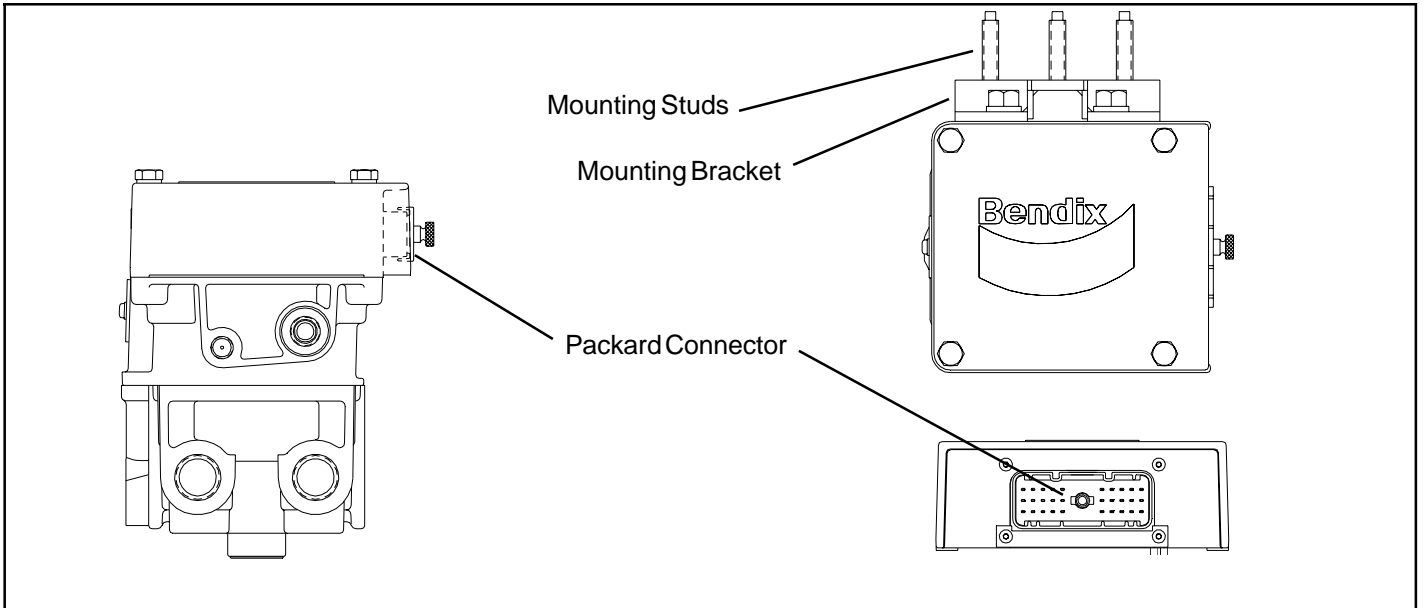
CR-16 Controller Relay Assembly (30 Pin Packard Connector)
